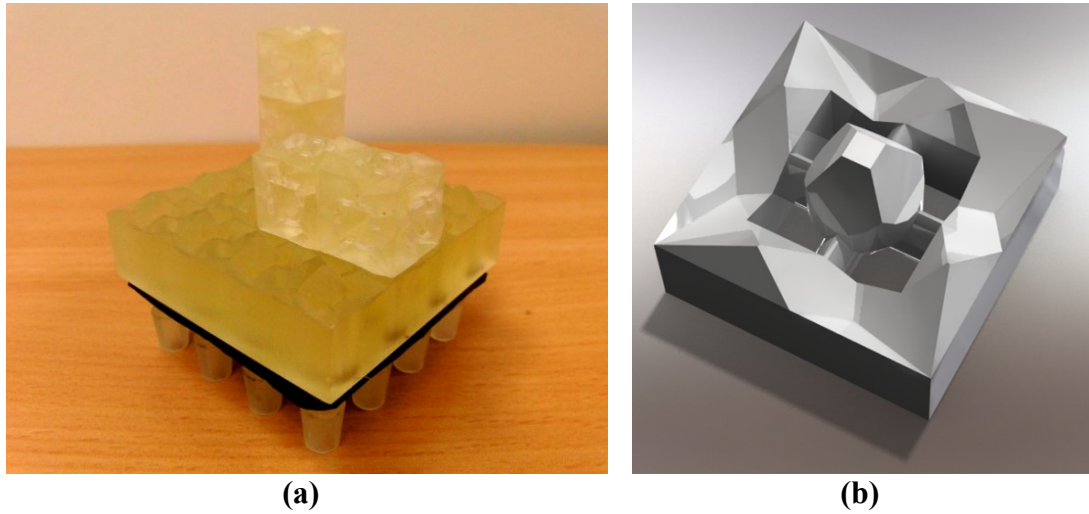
Assembly substrate. (a) 3-D printed substrate component with 16 ports shaped to complement cube faces. (b) Rendered CAD drawing of one of the outlet ports with a centre pyramid for alignment and four corner channels.
